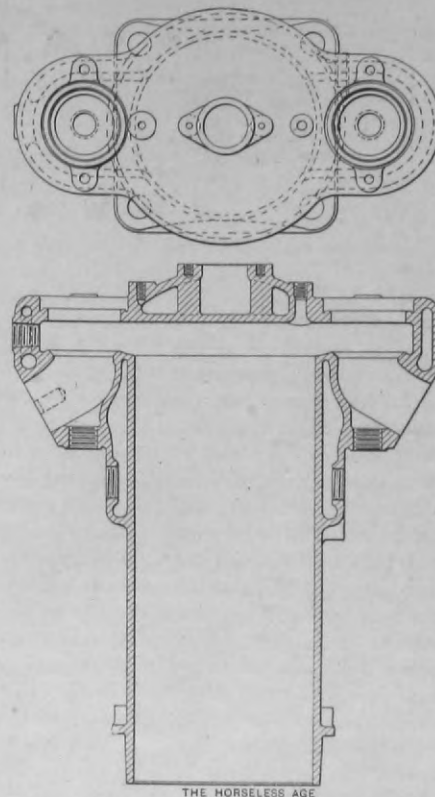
TOP VIEW AND SECTION OF CYLINDER.
